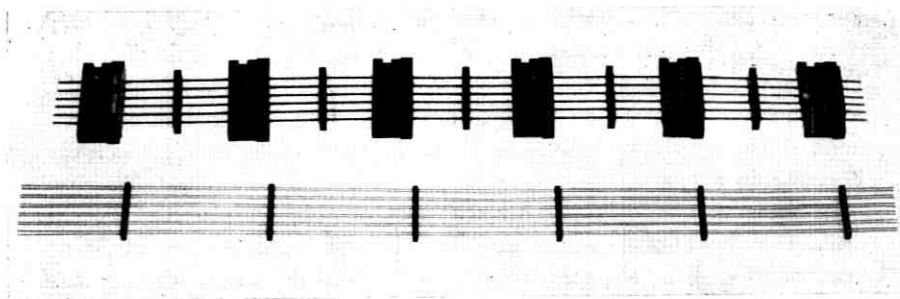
BF relay movable twin wire molded ladder (bottom) and fixed single wire molded ladder (top).
